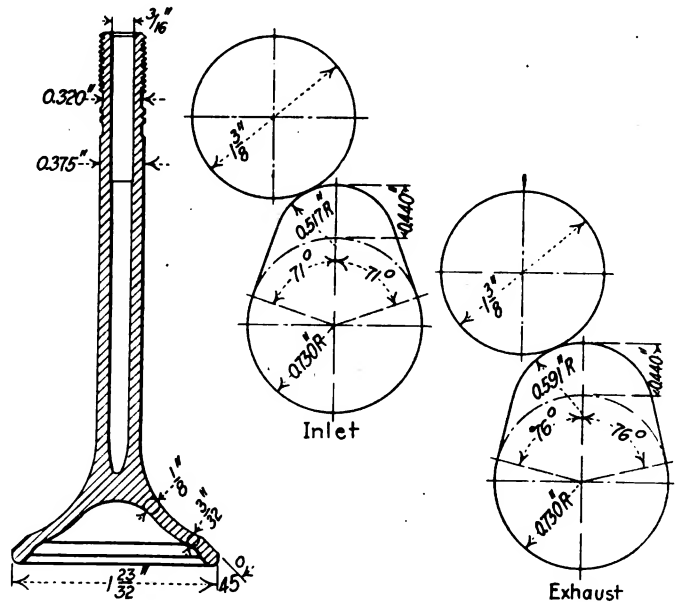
AT THE LEFT THE VALVE USED IN THE AIRCO CYLINDER AND AT THE RIGHT THE INLET AND EXHAUST-VALVE CAMS
